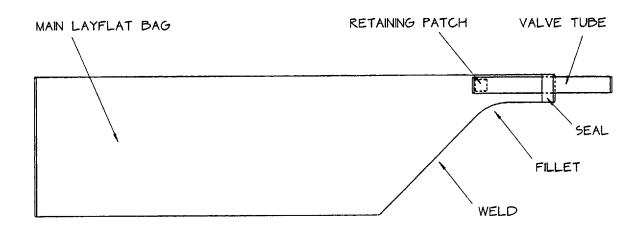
The non-return valve and welding detail of a layflat tube.
